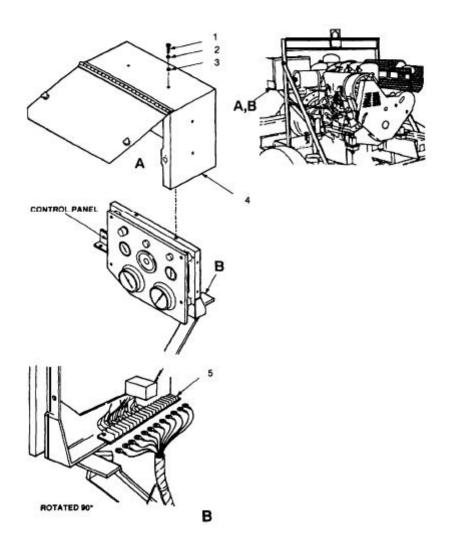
Wiring Harness Testing (Sheet 1 of 2) (Model 350 PAWN).
